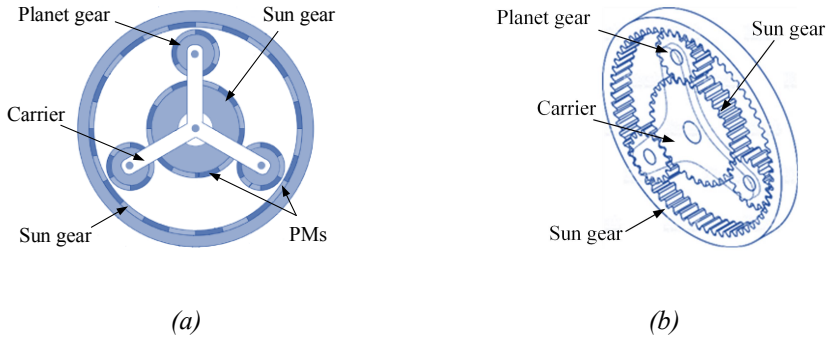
The planetary gears, (a) magnetic planetary gear, (b) mechanical counterpart.
